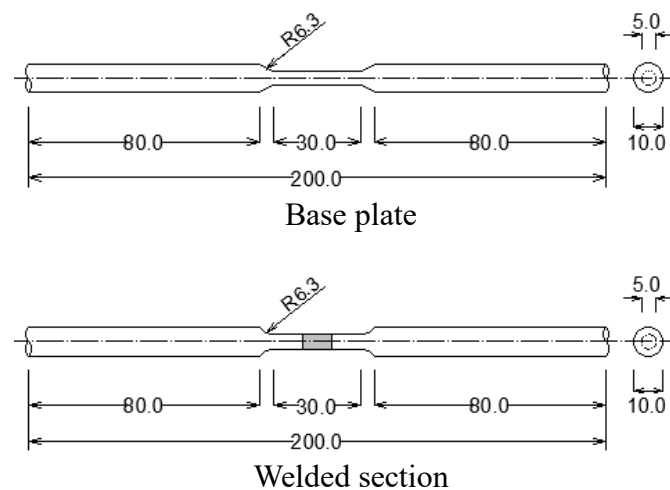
Dimensions of standard cylindrical coupons for tensile tests: S690-QT
